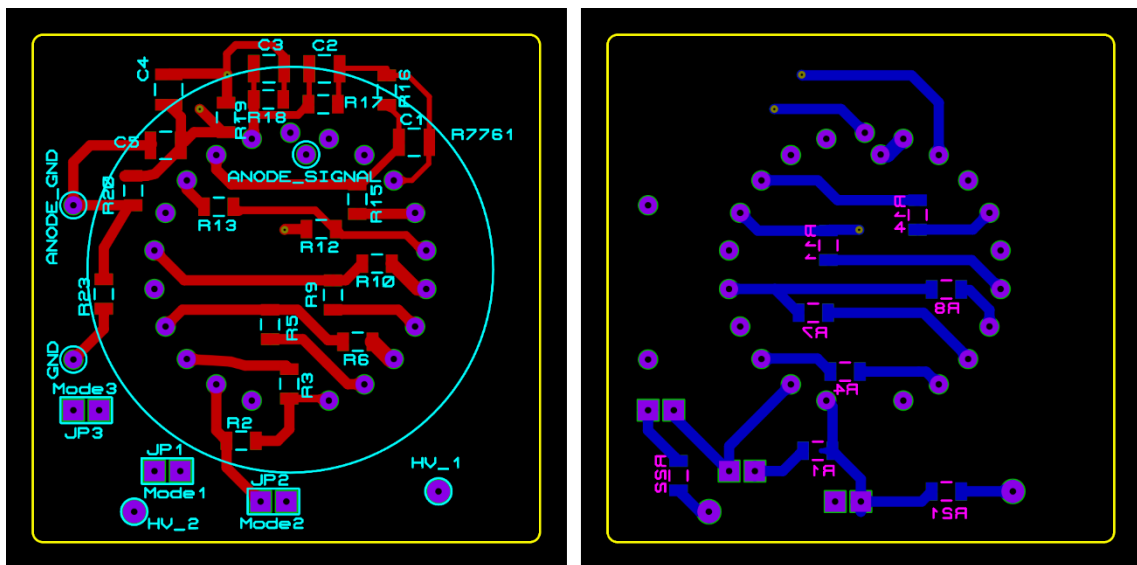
PCB layout view of top side (left) and bottom side (right) for manual controlled R7761 type Photomultiplier tube.
